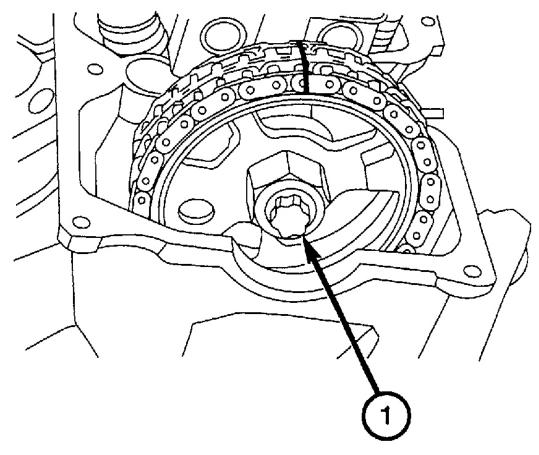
Removing Oil Pump Drive Chain & Tensioner Courtesy of DAIMLERCHRYSLER CORP.
